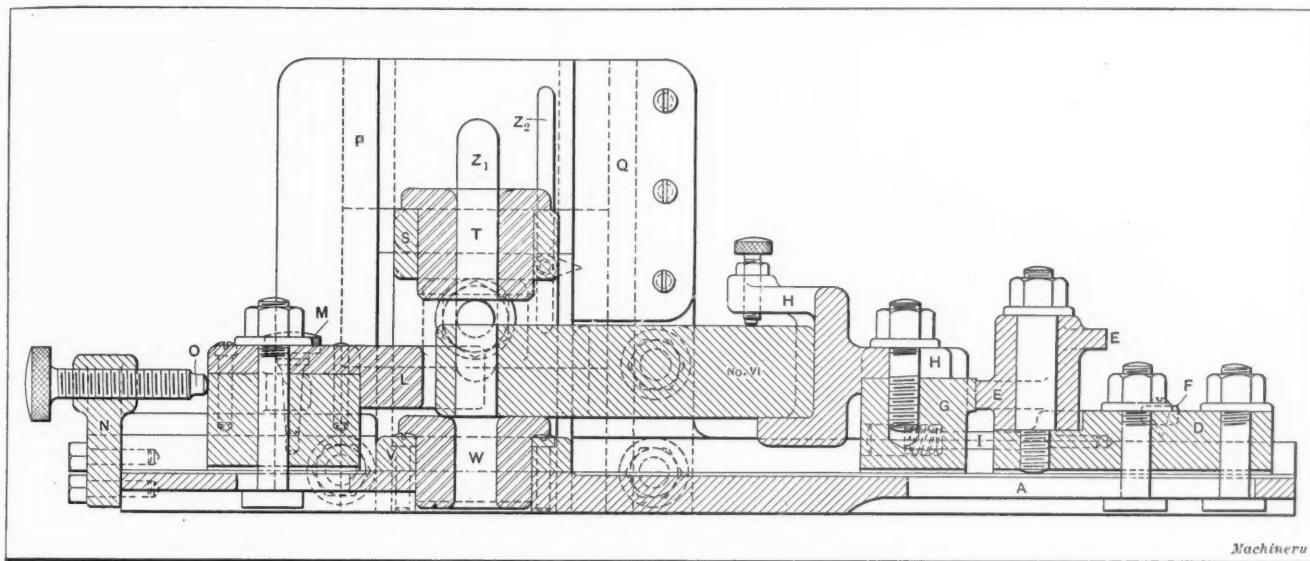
Cross-sectional View of the Universal Drill Jig on Line a-b
